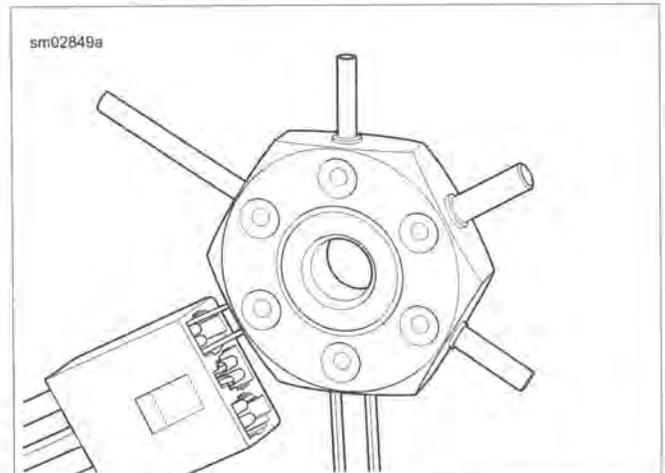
Removing Autofuse Unsealed Terminal from Ignition Switch
